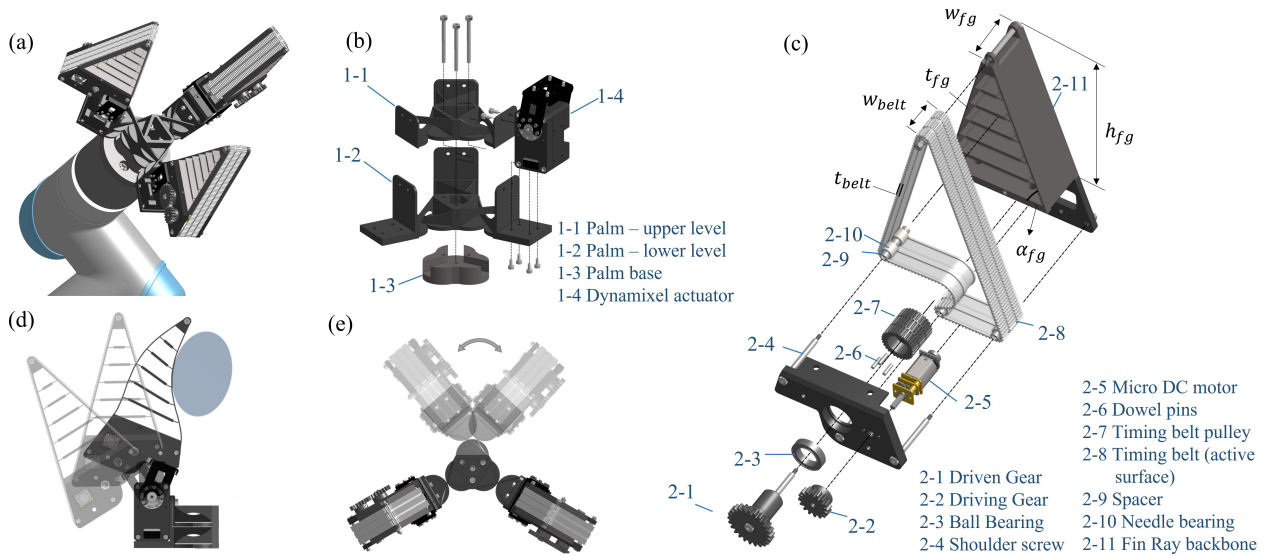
A CAD model of the BACH: (a) An illustration of the BACH mounted on a UR5 robot. (b) An exploded view of the palm. (c) An exploded view of the finger with active surface. (d) Compliant grasping of the finger. (e) Adaptive pivot joints
